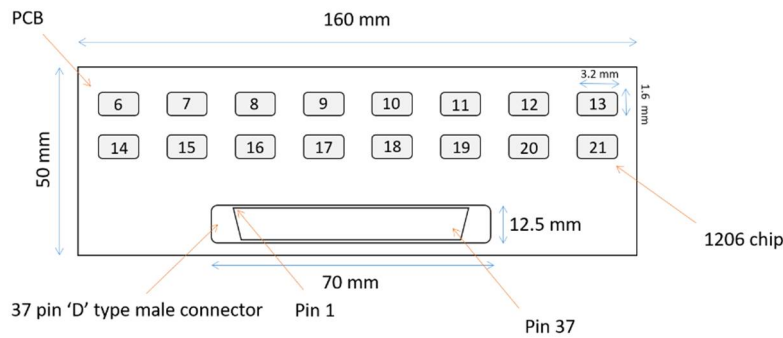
PCB test board, including 16 of 1206 chip resistors and type-D external connector
